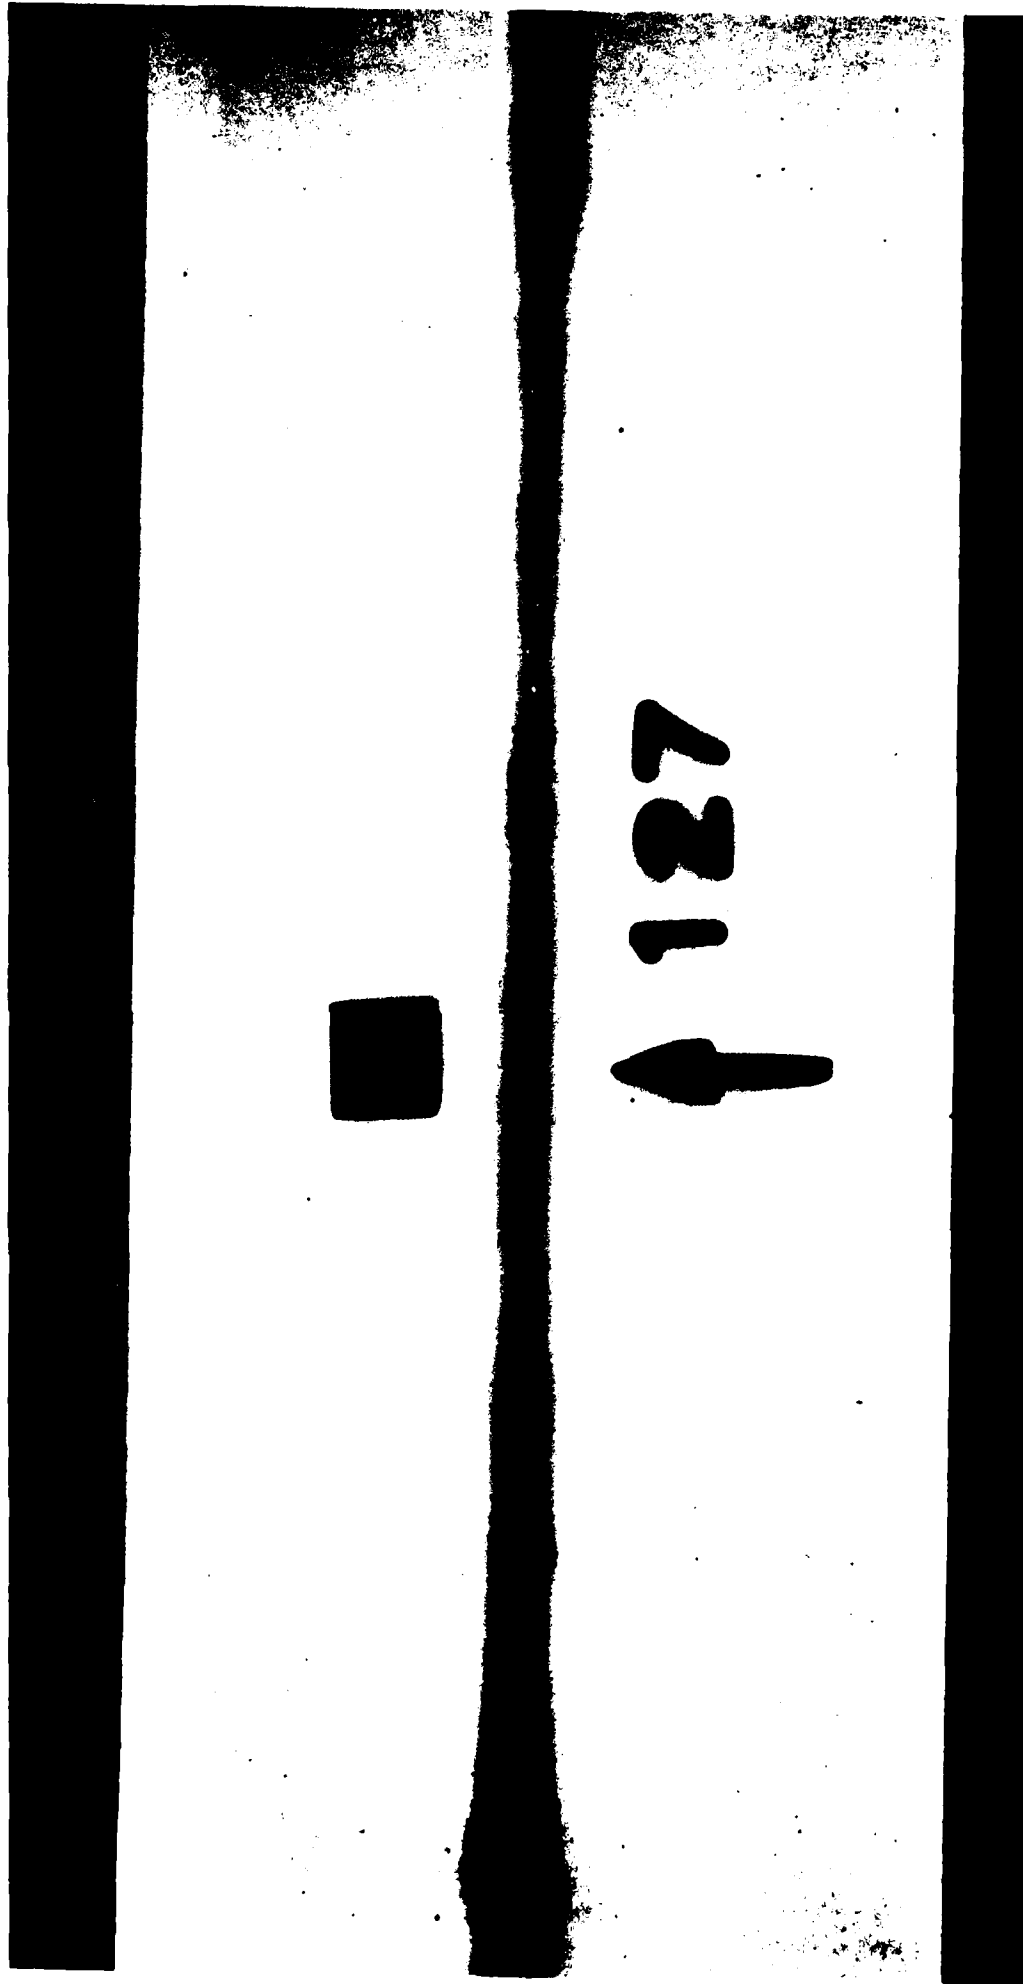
RADIOGRAPH OF CLEAR WELD (3/4 INCH PLATE)
